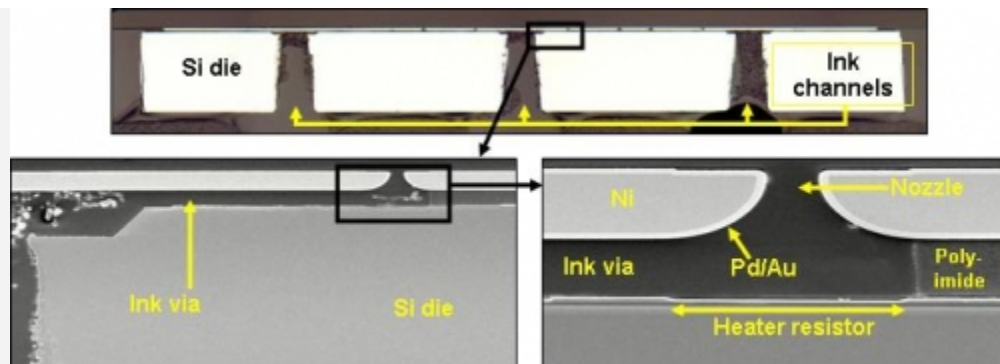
Cross-section of die, nozzle plate and ink channels.
